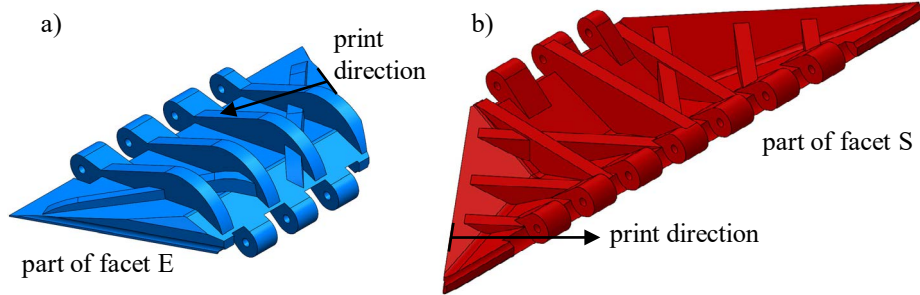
Parts of facet E and S, the shown print direction is perpendicular to print layers
